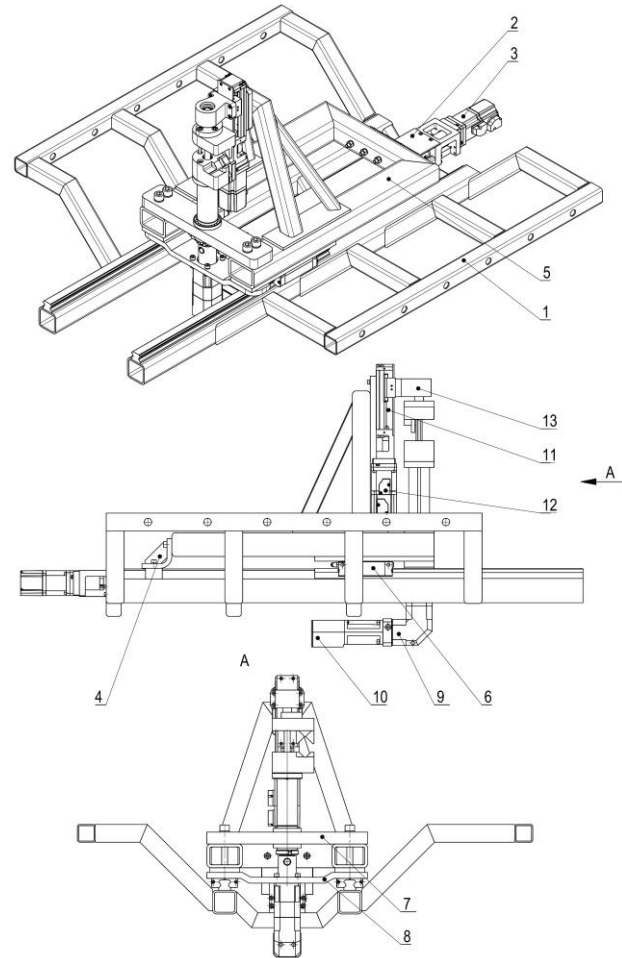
Sliding gripper assembly: 1 – main frame of the gripper assembly, 2 – translational motion drive system, 3 – translational motion stepper motor, 4 – sliding frame bracket, 5 – sliding frame, 6 – linear guide, 7 – gripper base plate, 8 – rotational drive base plate, 9 – gripper rotation angular gear, 10 – gripper rotation servomotor, 11 – gripper closure ball screw, 12 – gripper closer ball screw, 13 – top jaw yoke
